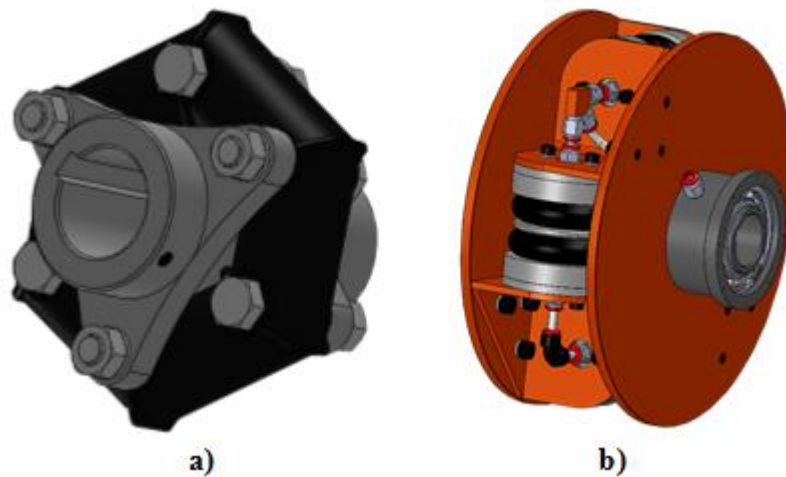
Flexible shaft couplings: a) Hardy coupling, b) pneumatic coupling of type 4-2/70-T-C
